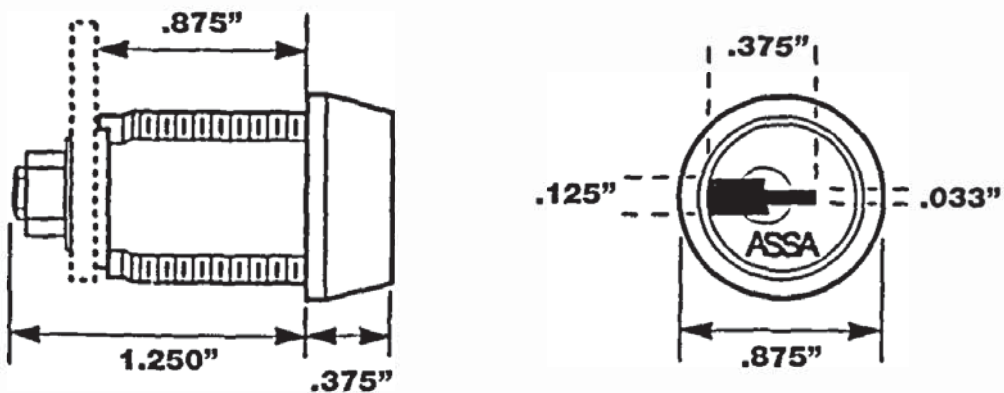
A. The stainless steel ASSA Desmo is an isolated keyed tumbler lock that sets a higher standard in pharmaceutical cabinet and door locks.
